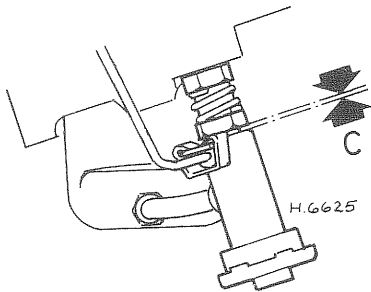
Correct position of jet assembly when testing diverter valve operation (Sec 35)
